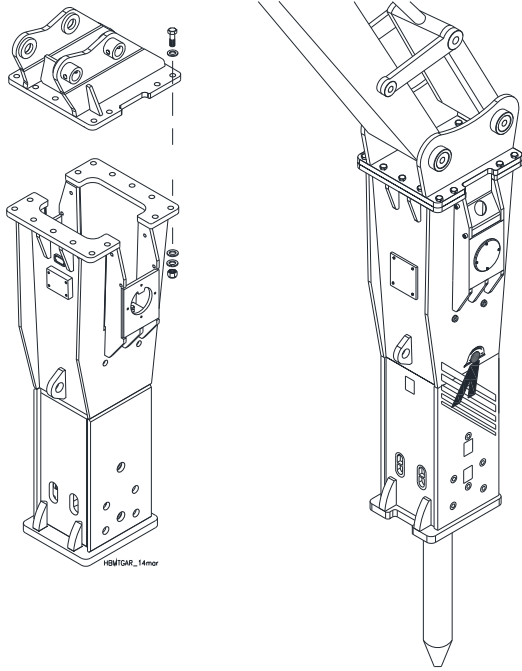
Housing Box, Mounting Bracket (Typical) & Bolt Set
